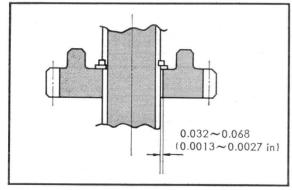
Clearance between counter shaft and counter shaft third gear
